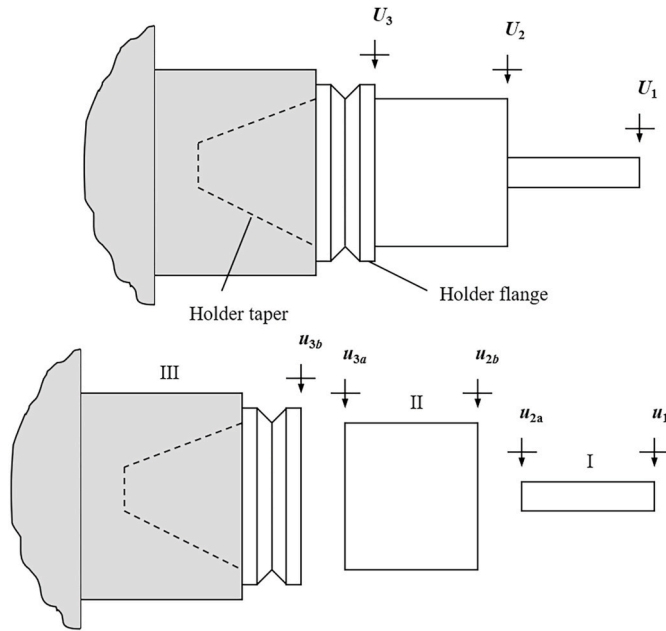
Three-component RCSA model with the spindle-machine identified as component III. (Top) assembly. (Bottom) components [14].
